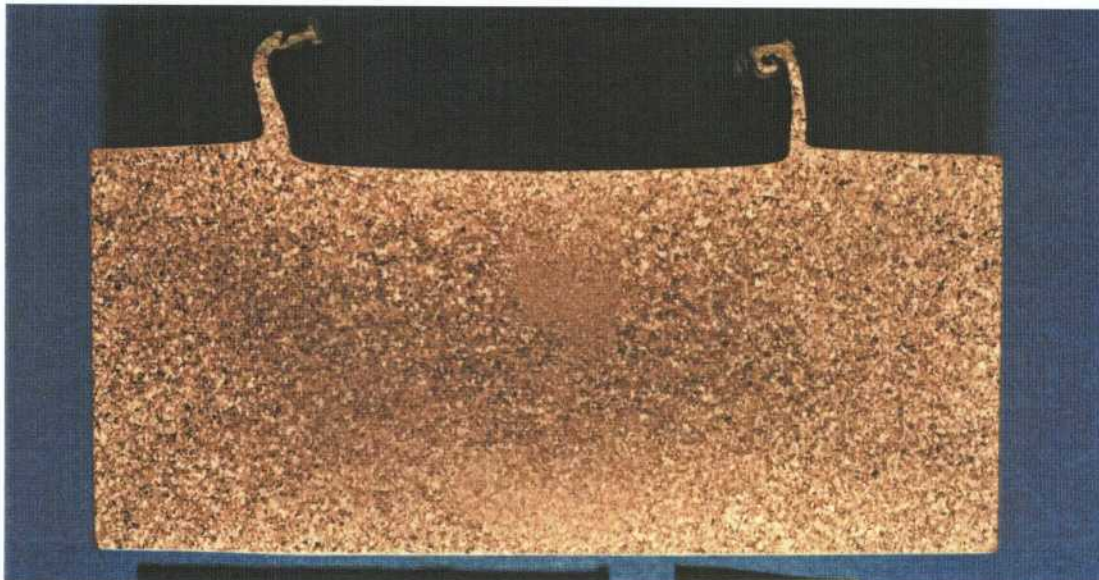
The welding zone in 40 mm thick copper plates after FSW.
